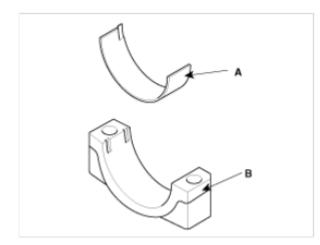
Identifying Connecting Rod Bearing And Cap Courtesy of HYUNDAI MOTOR AMERICA
